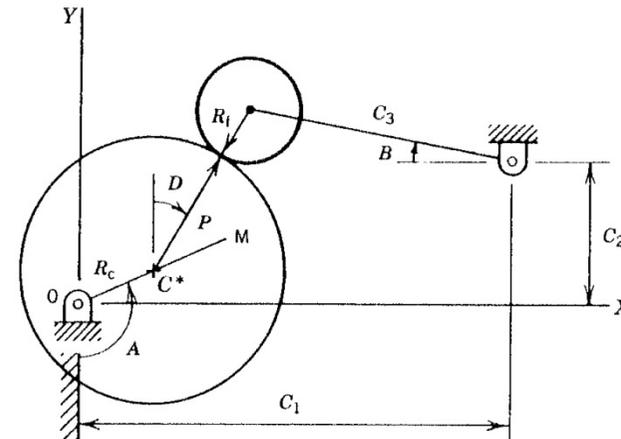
Full Circle Eccentric Cam with Pivoted, Roller Follower
